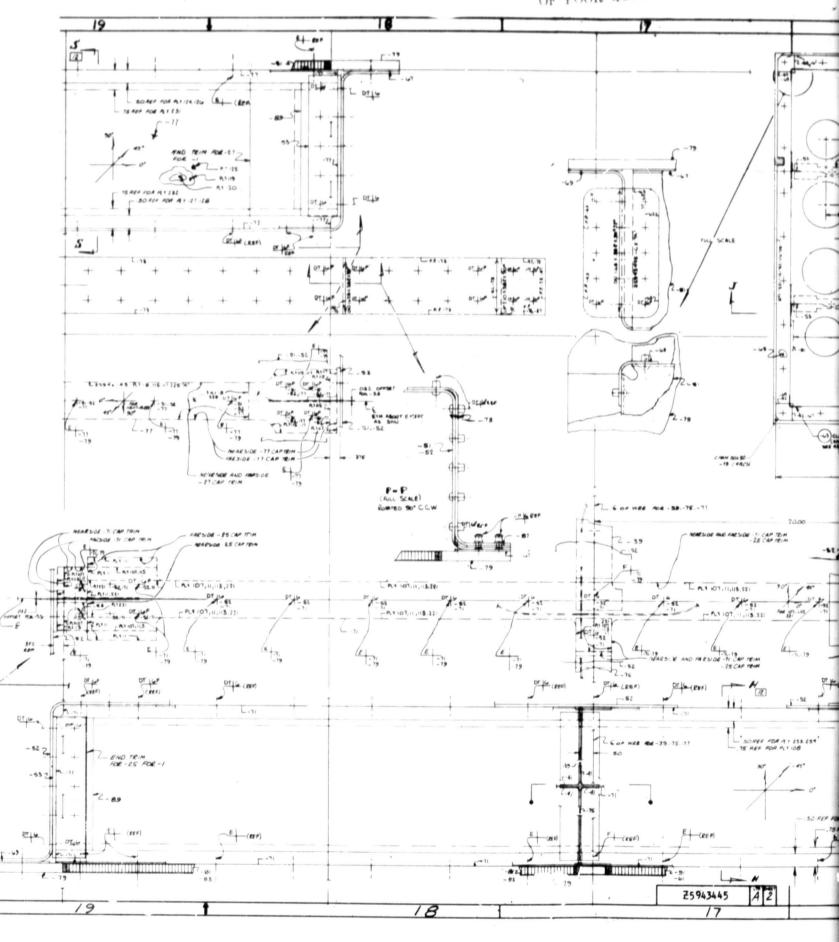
DRAWING Z5943445 — SPECIMEN ASSY —
